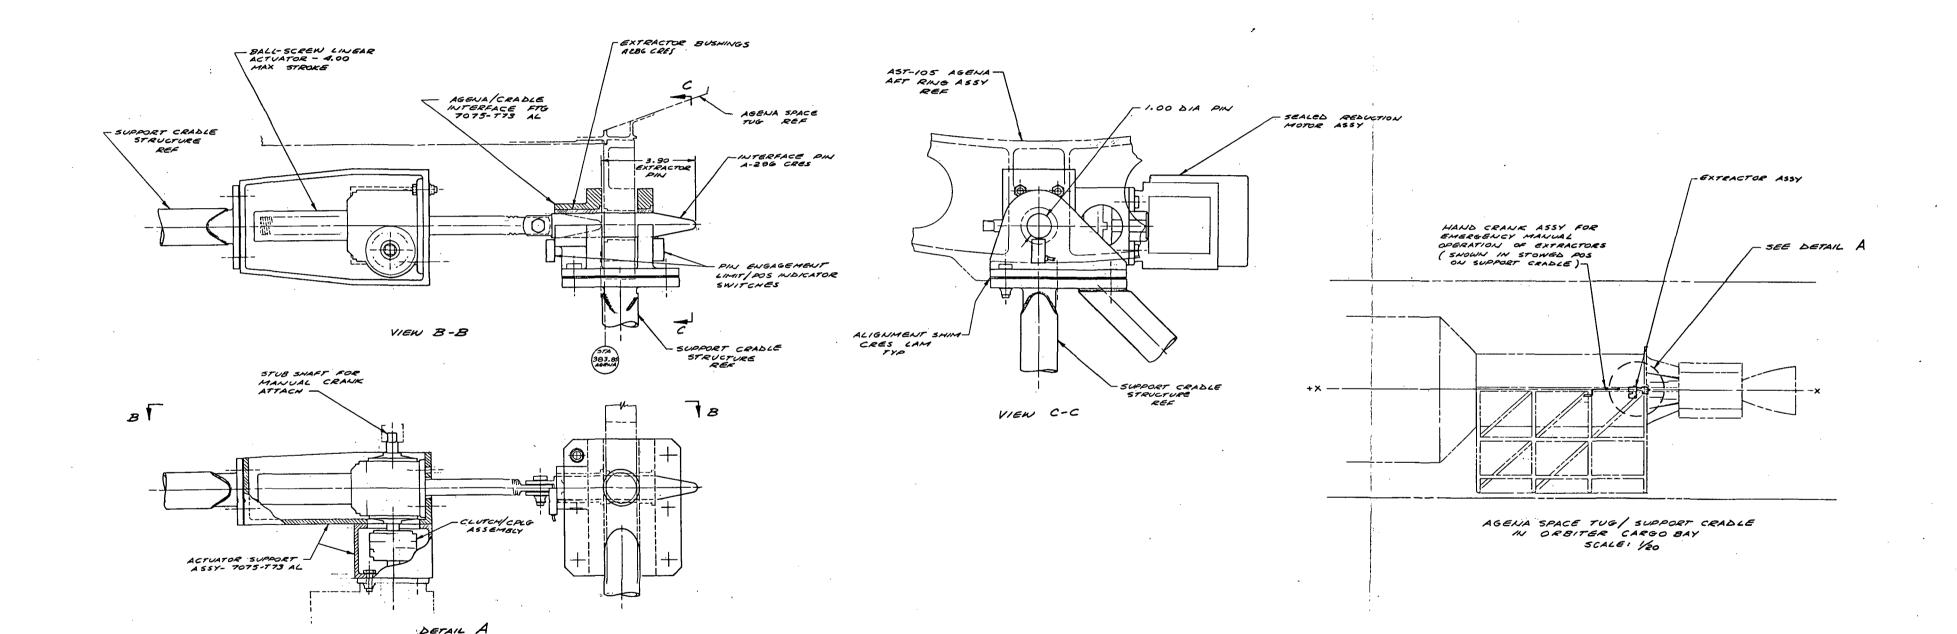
Agena Tug/Support Cradle Extractor Assembly Detail 3-17
